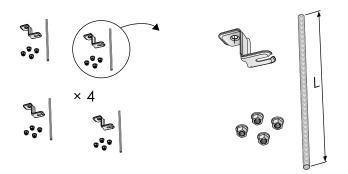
Assembly fitting SYST MS M8-1, ceiling mount and threaded rod
